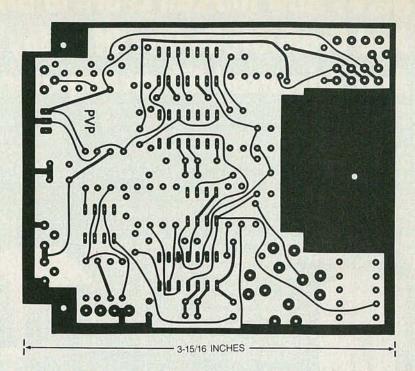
THE COMPONENT SIDE of the double-sided display PC board. It, too, is shown full sized.
